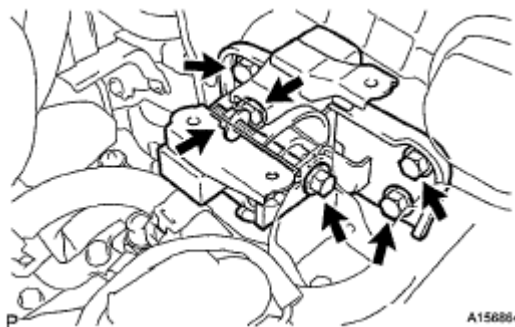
Identifying Engine Mounting Insulator Bolts And Nut
